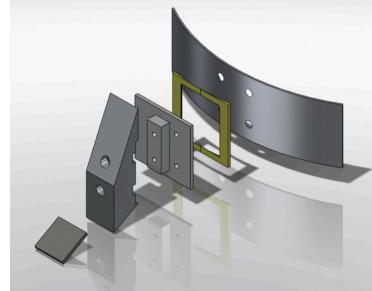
MIRROR MOUNT CAD MODEL FRONT VIEW
